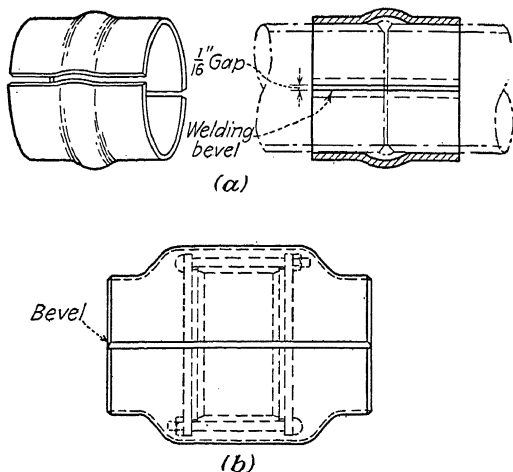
Use of split welding sleeves: (a) to repair defective line-joint weld; (b) to repair leaking coupling.
